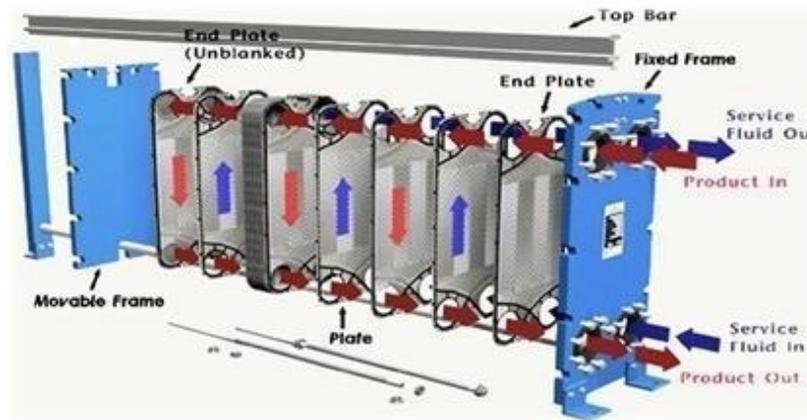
Flat Plate Heat Exchanger (HEXtypes.com)
